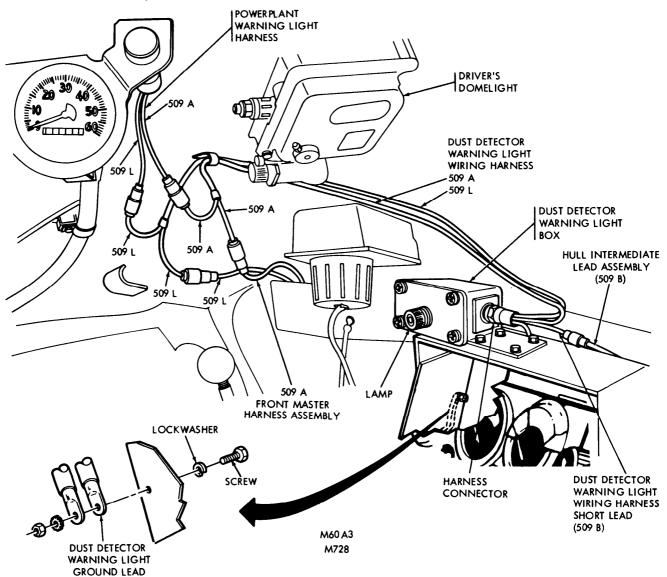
Dust detector warning light wiring harness assembly replacement (Sheet 1 of 2).
